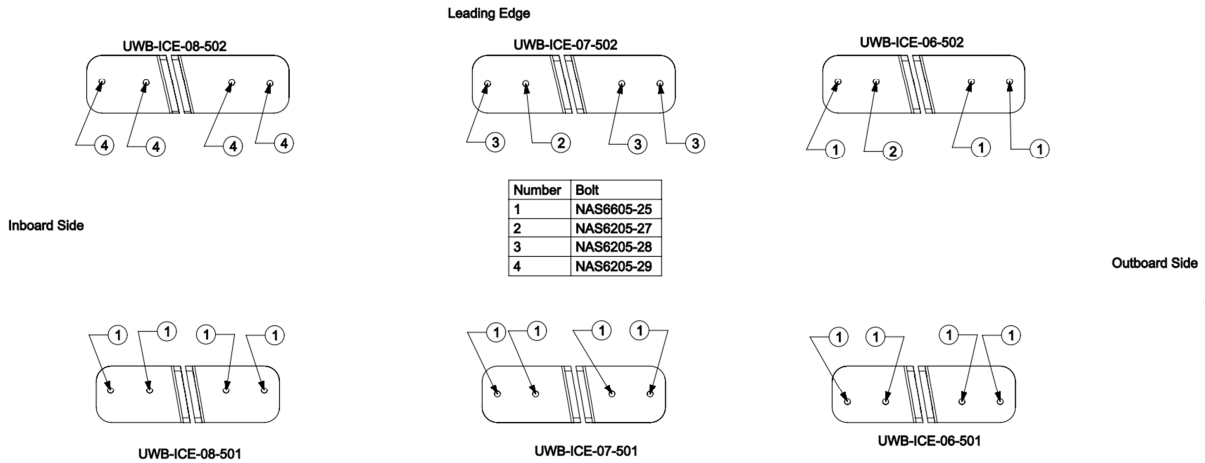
Port Wing Upper Pylon Lug Fastener Placement
